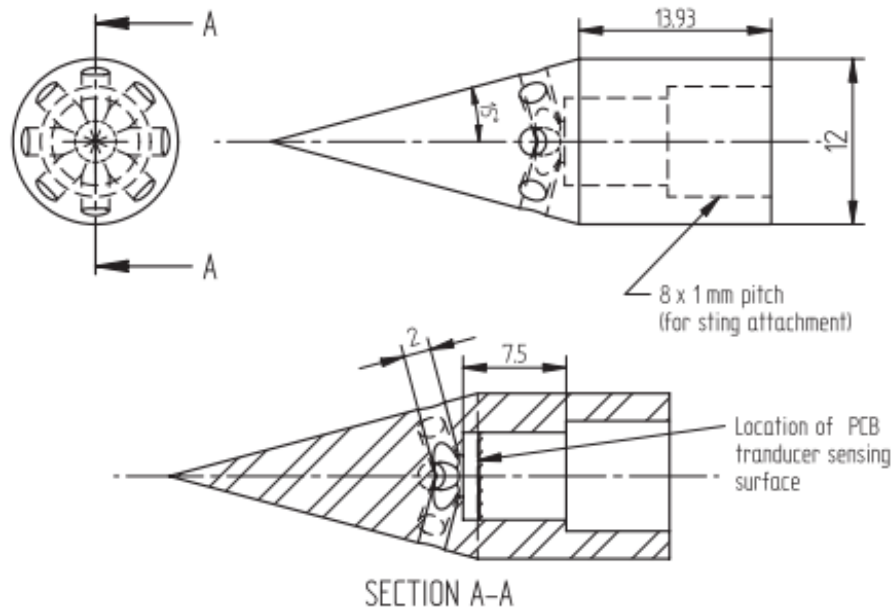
A detailed schematic of the protective pitot probe cap designed and produced by Gildfind et al.[9]
